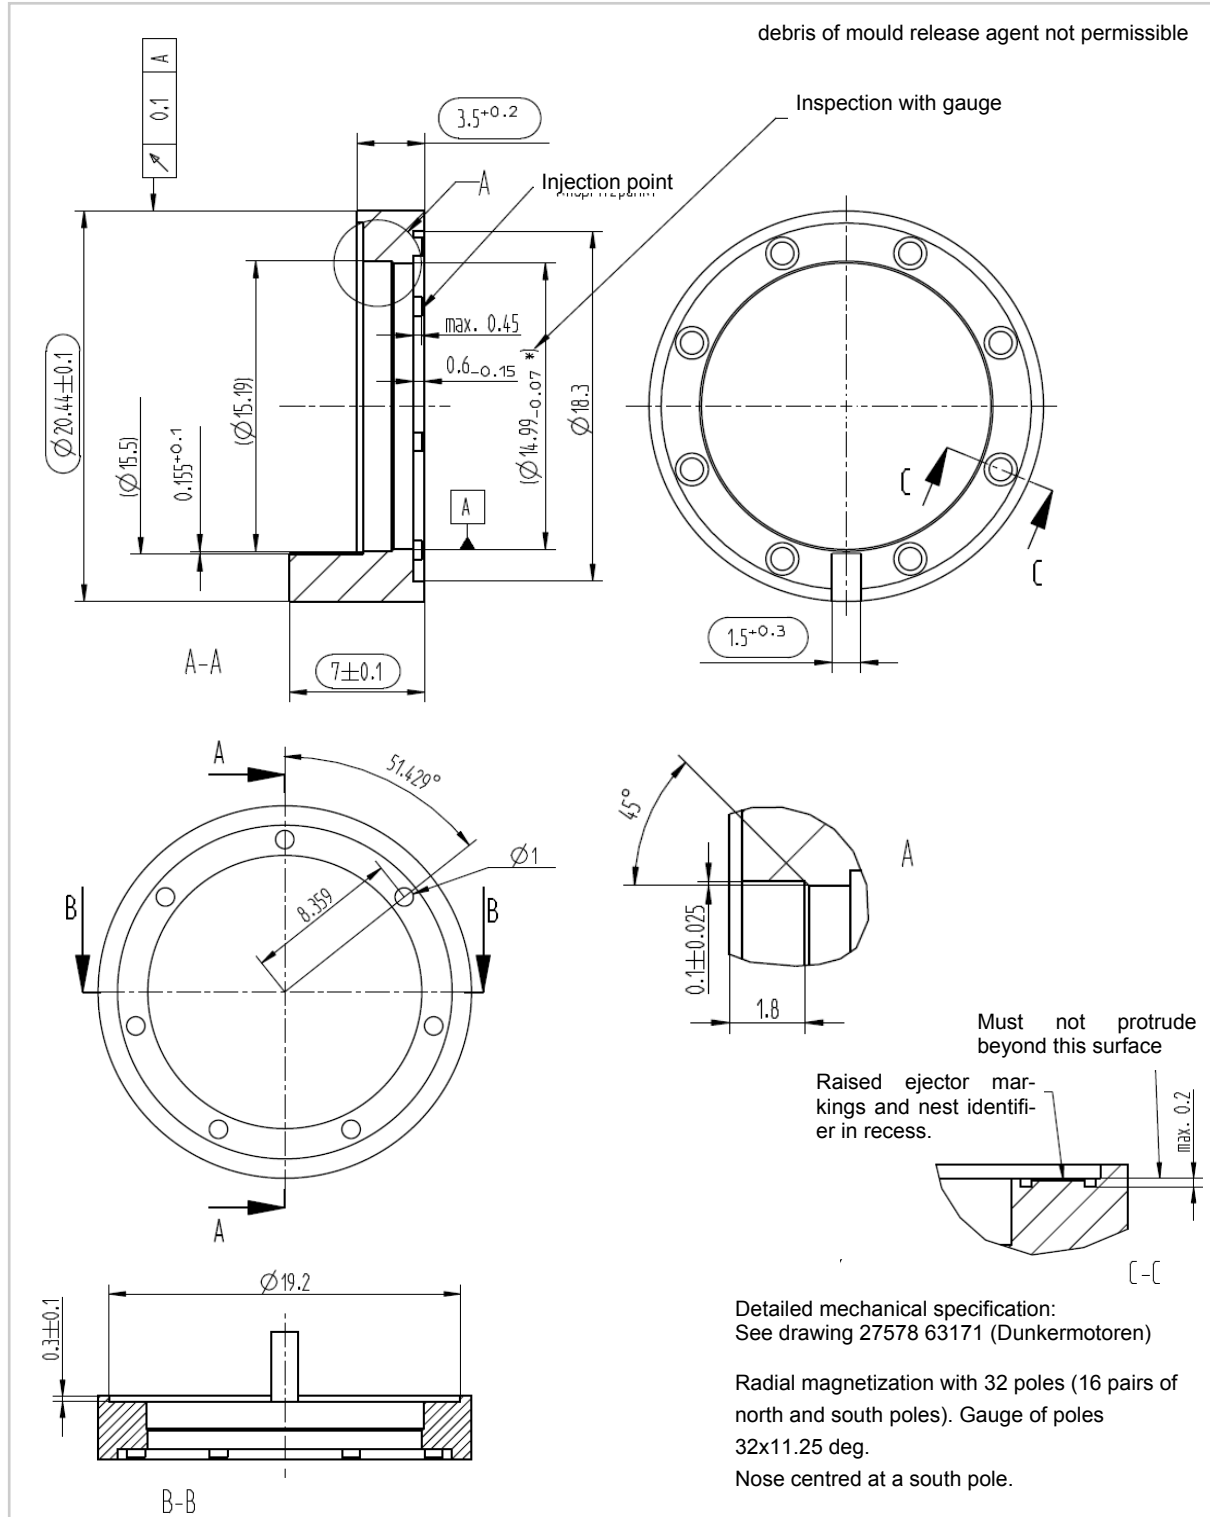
Pole ring (all dimensions in mm unless otherwise specified).
